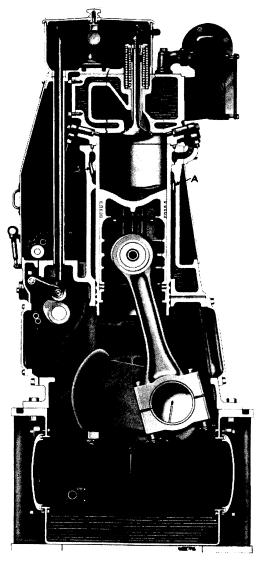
Ingersoll-Rand Diesel Engine, Type S.
